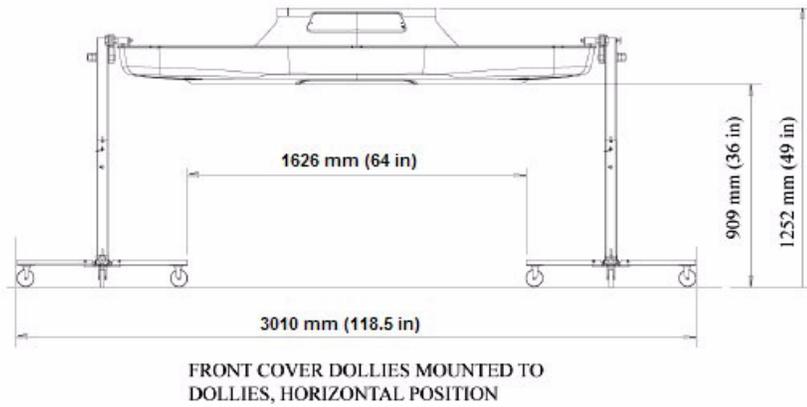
Gantry Front Cover with (Horizontal) Service Dolly Dimension
